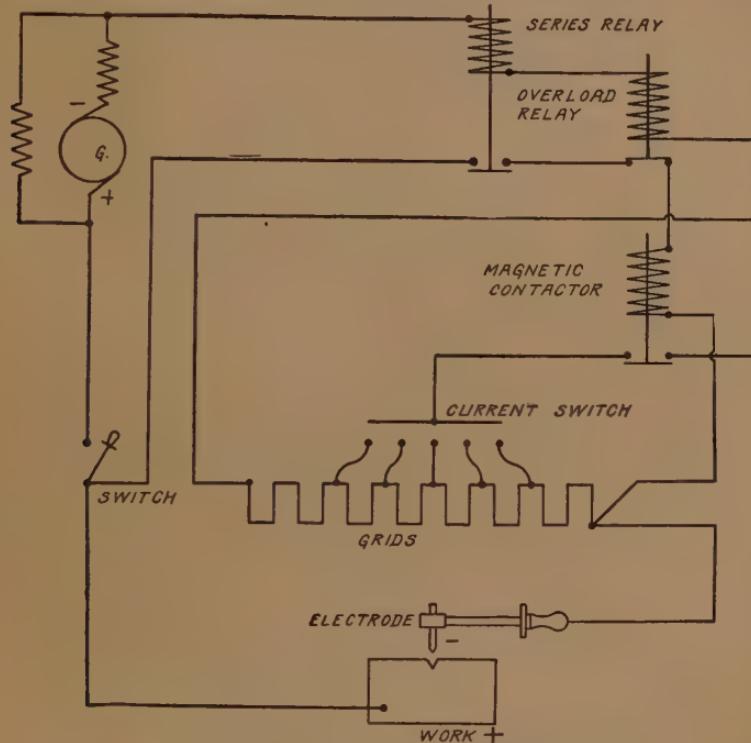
Wiring Diagram for C & C Welding System
